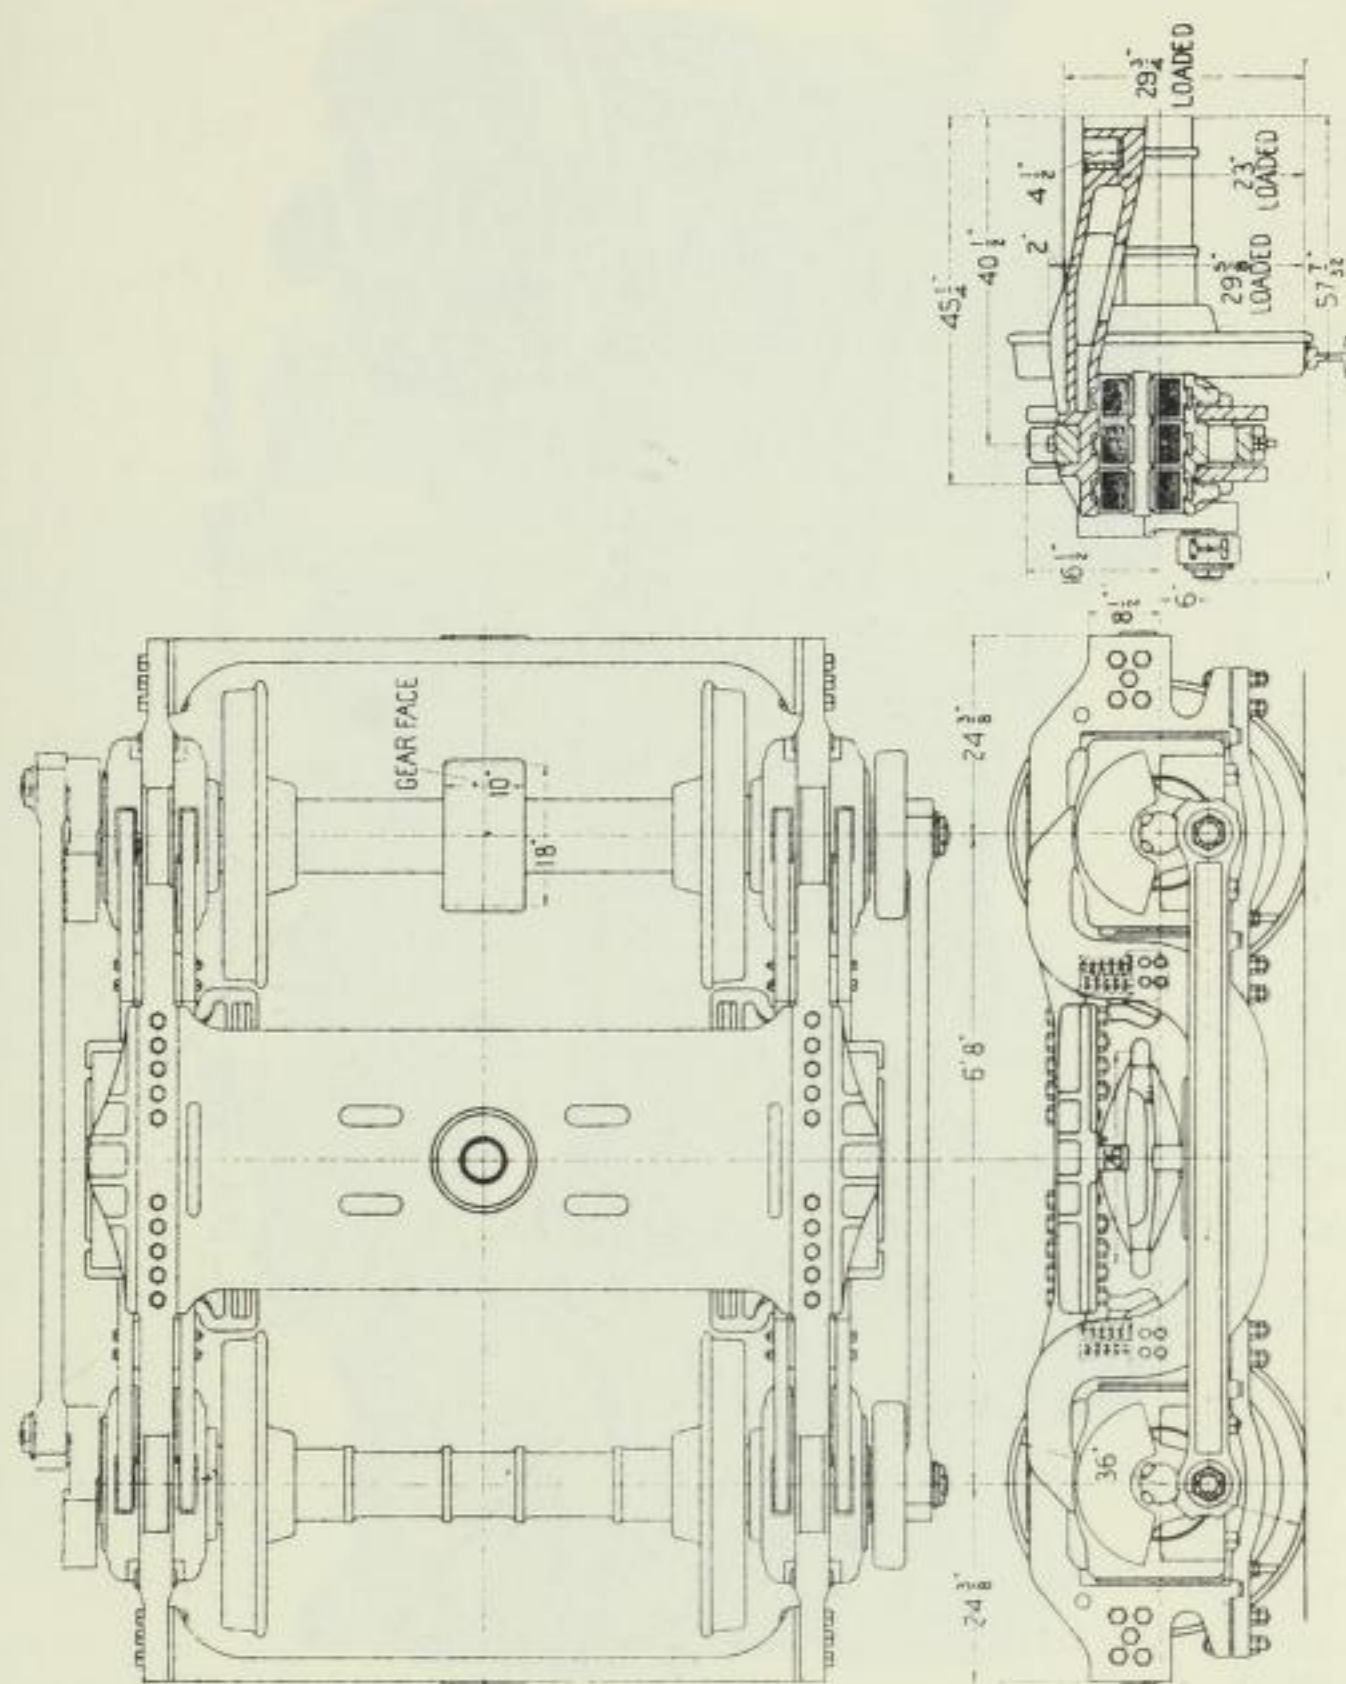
Truck Assemblage of Bethlehem Auxiliary Engine.
